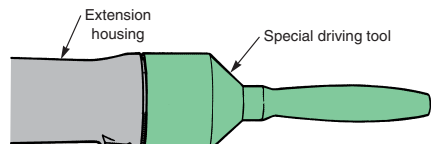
After installing the extension housing, install a new rear seal using the proper driver. Worn extension bushings should also be replaced. (DaimlerChrysler)
